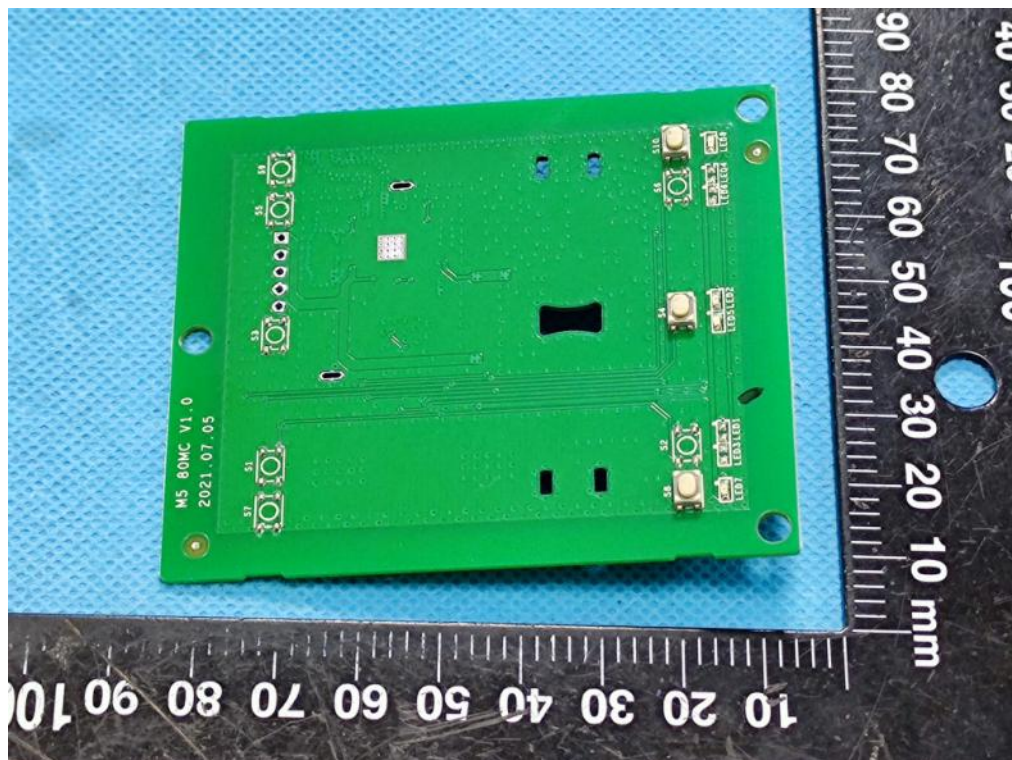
PCB bottom view of control board(Model: M5-3C-80)
